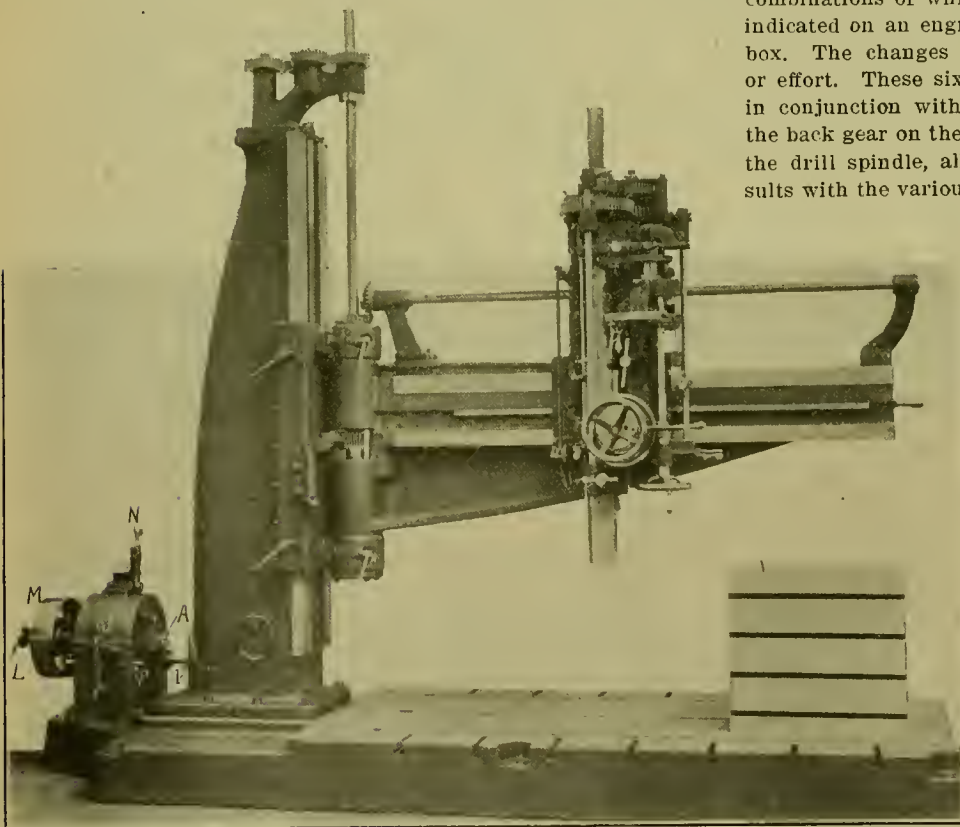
VIEW OF THE 6-FT. FOSDICK RADIAL DRILL AS EQUIPPED WITH THE NEW VARIABLE-SPEED GEARED DRIVING MECHANISM—FOSDICK MACHINE TOOL COMPANY.
